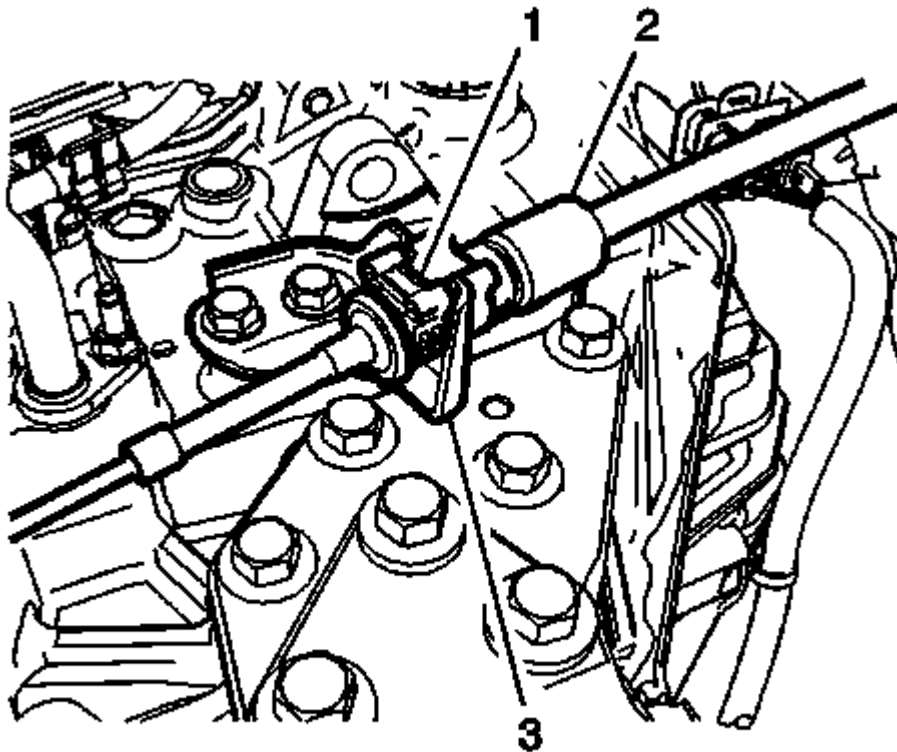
Transmission Range Selector Lever Cable And Cable Bracket
